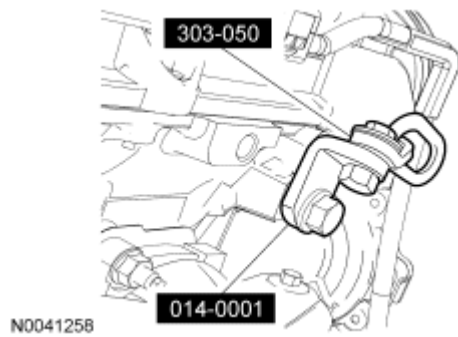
Identifying Special Tools (303-050 And 014-0001)
